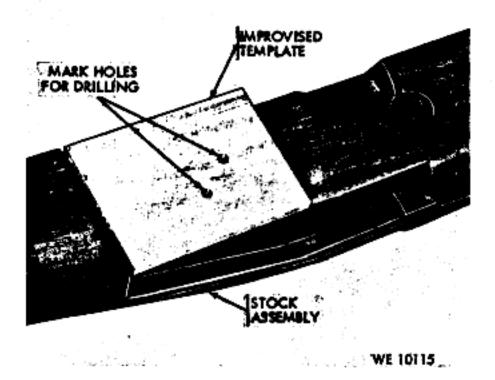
Marking location of holes for installation of mounting plate for Grenade Launcher Sight M15 using improvised template.
